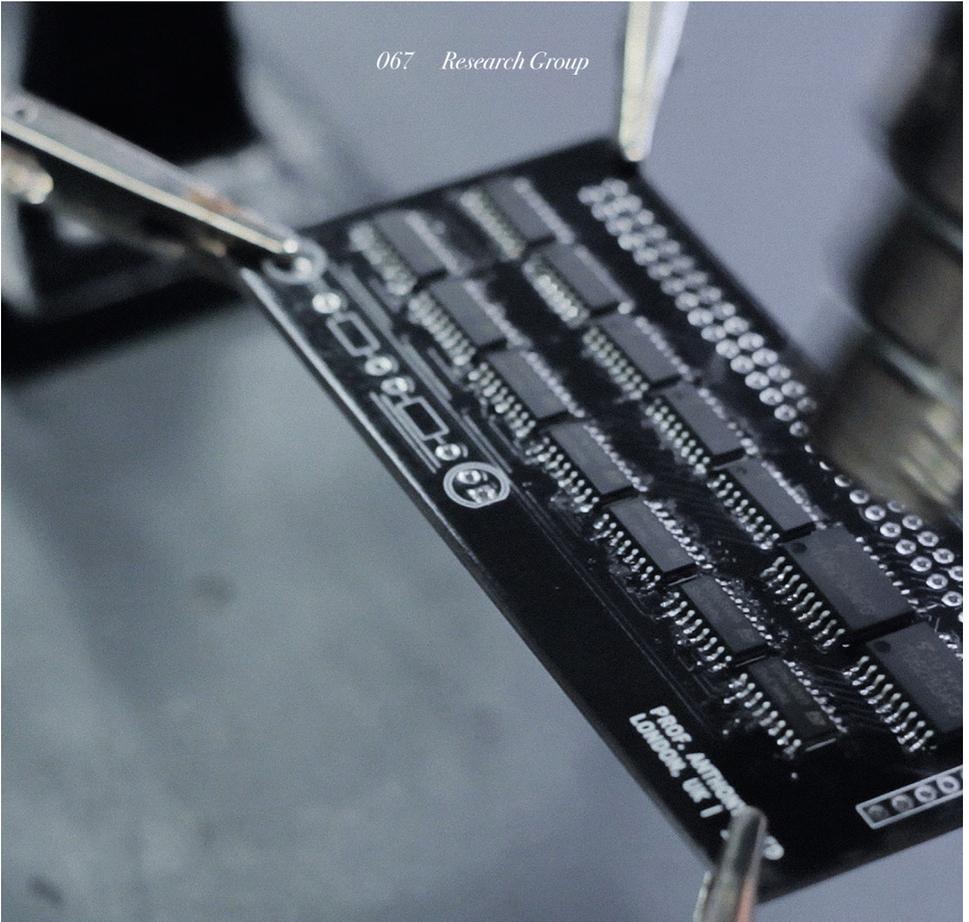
Soldering SMD parts onto a PCB for controlling Flipdots with hot air – the PCB was in the end never used.
